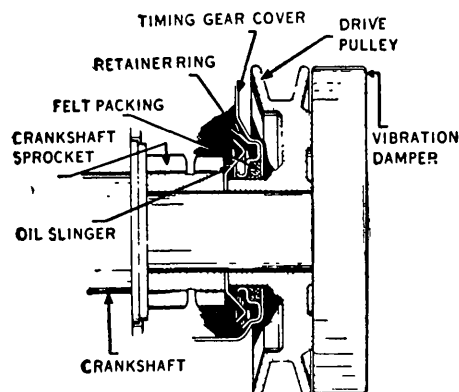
Crankshaft front end seal, 1936-50 L-Head
